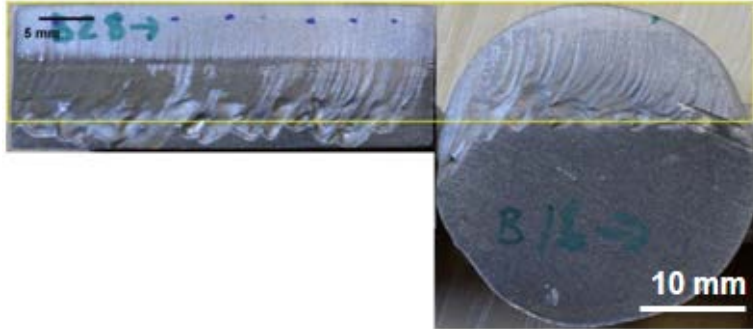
9: Equivalent D_c for flat and cylindrical castings ($V_t=300$ mm/min): (a) 13 mm thick flat casting (b) 30 mm diameter cylinder
